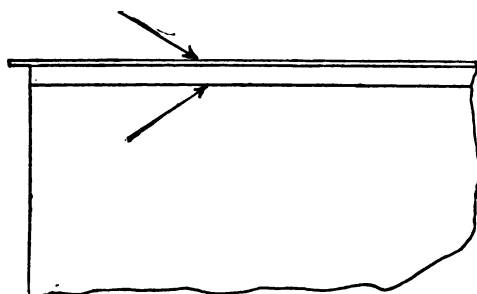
Diagram showing the relative positions of the welding burner to secure the simultaneous heating of both sections of an angle-ring to prevent warping.
